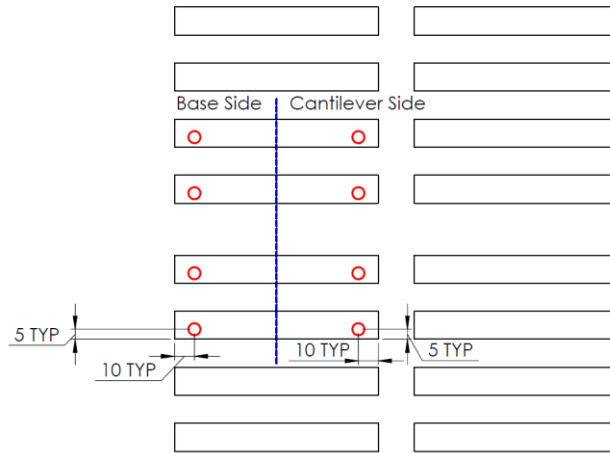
POI SolidWorks drawing for Test Build #2 (units: mm)
